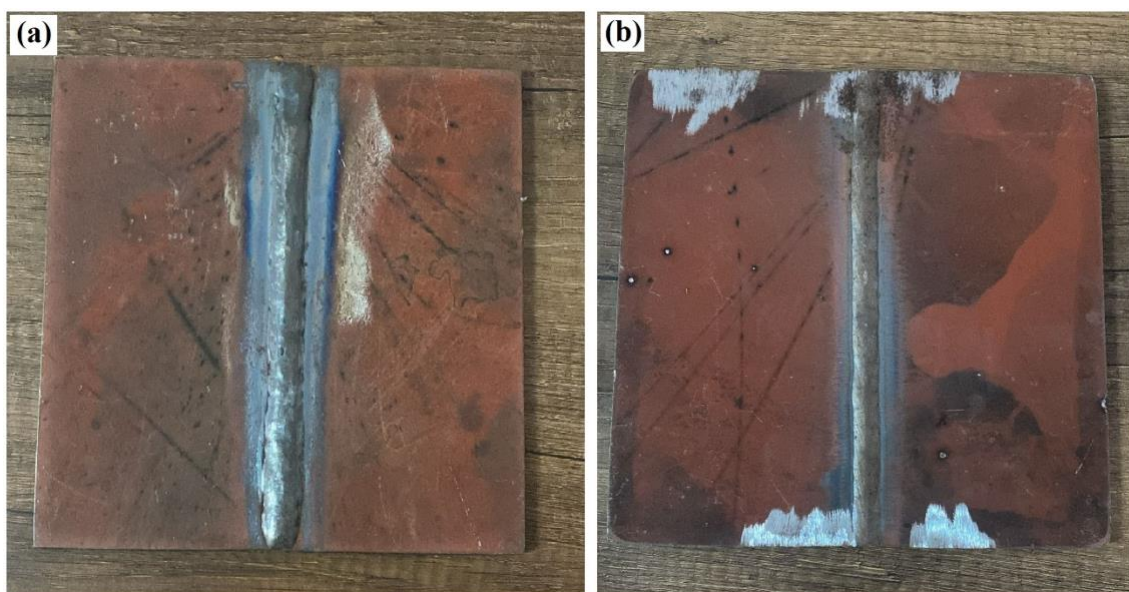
Images of welded structures: (a) gas metal arc welding and (b) submerged arc welding.
